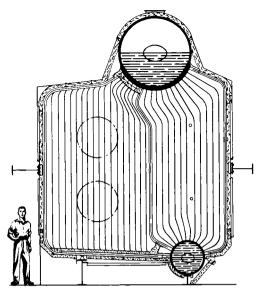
Water-tube package boiler, single-pass gas.
